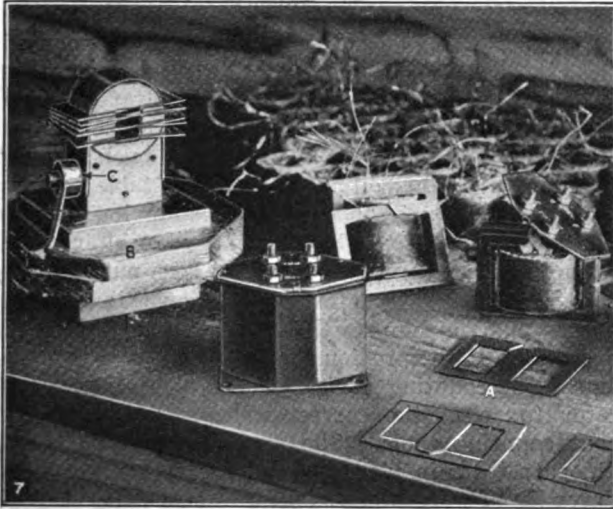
ASSEMBLING A TRANSFORMER CORE. FIG. 8. ANOTHER ASSEMBLY FIXTURE
